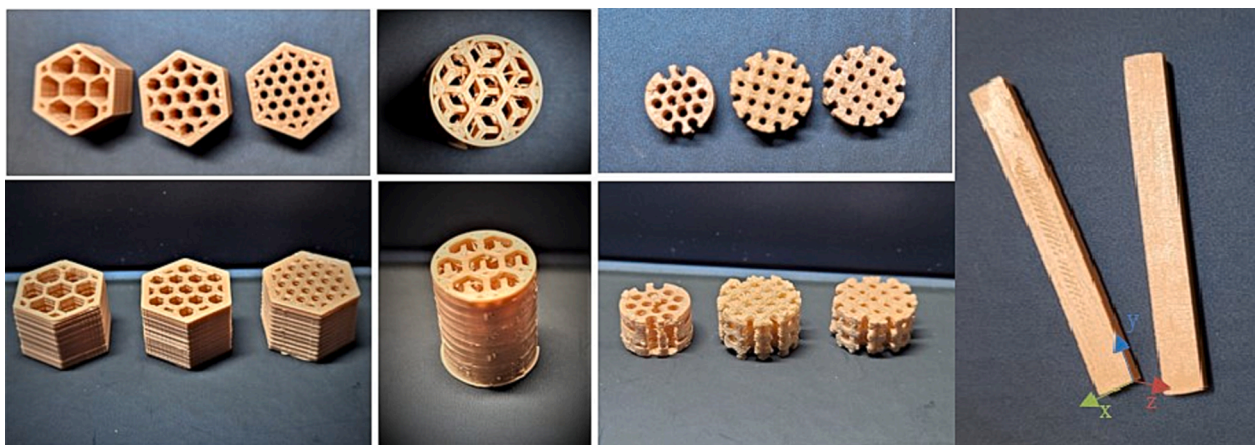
Pictures of the final optimised ceramic components, porous structures (top and side view) and bars made of ceria, after debinding and sintering.
